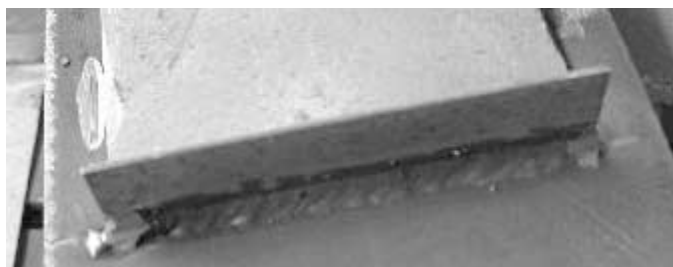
Flare-bevel weld in 1.5-mm sheet steel produced by Fabricator A
